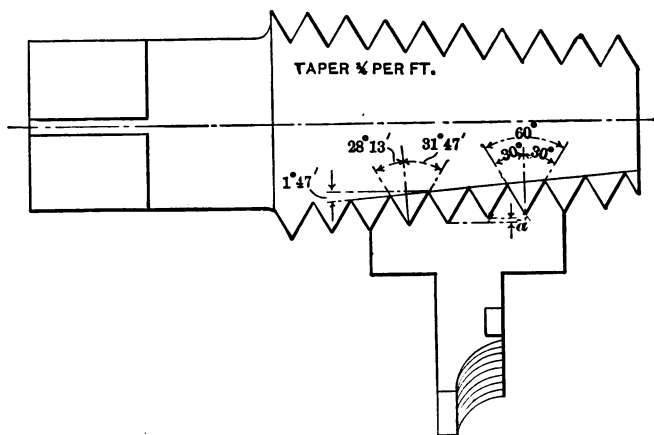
Taper Tap cut with Chaser made According to the Method shown in Fig. 57
